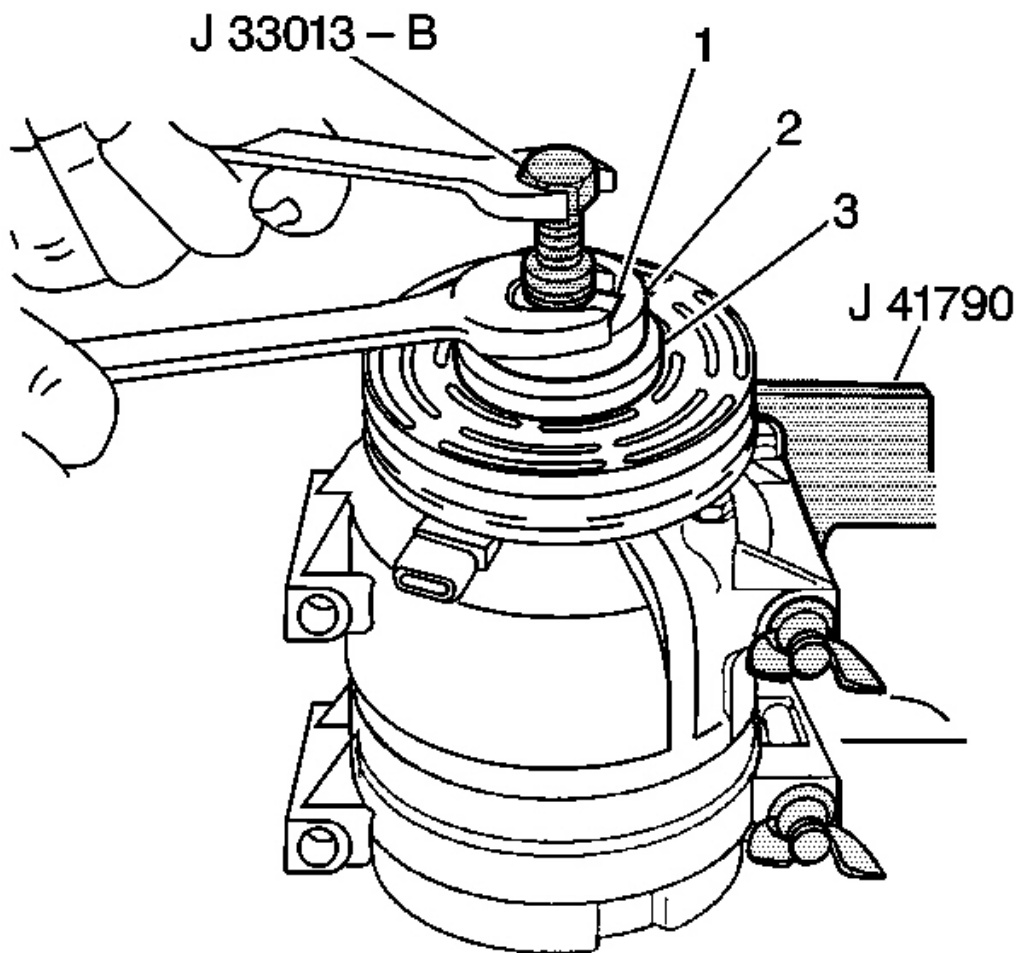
J 33017, J 33013-B, A/C Compressor Clutch Rotor & Bearing Assembly
